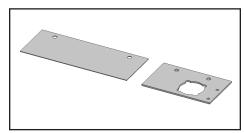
Replacement cover plate and torque master plate. Located in the interior packaging with the leveling tools.
